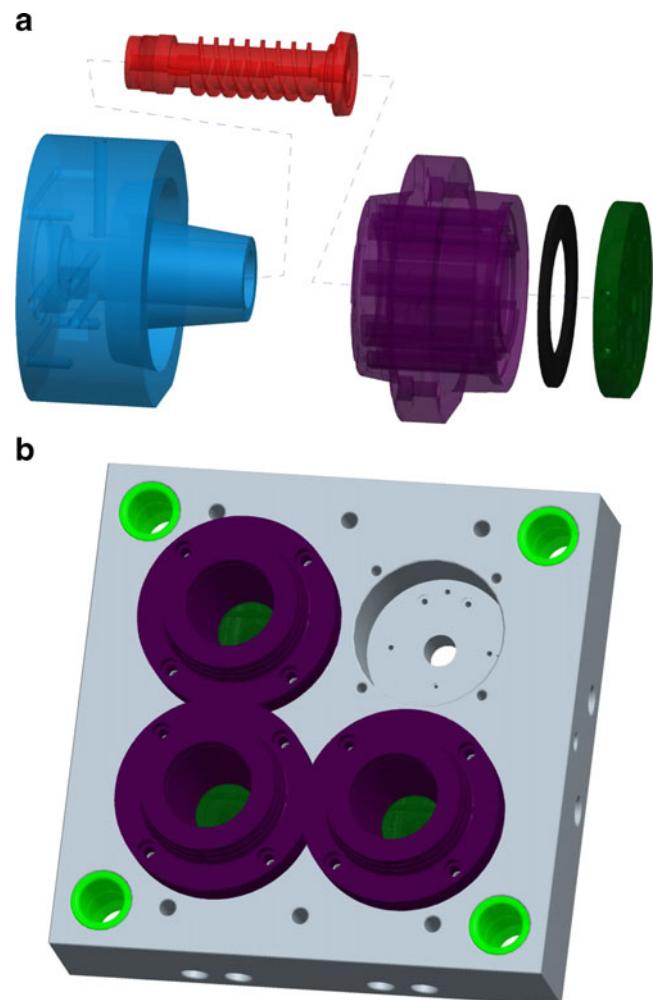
The assembly drawings of a coffee-cup injection mold: a mold insert, b female mold base
